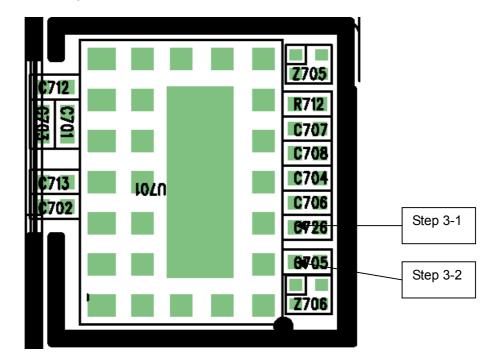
PAM TXEN and DCSSEL Test Point on the PCB Layout
